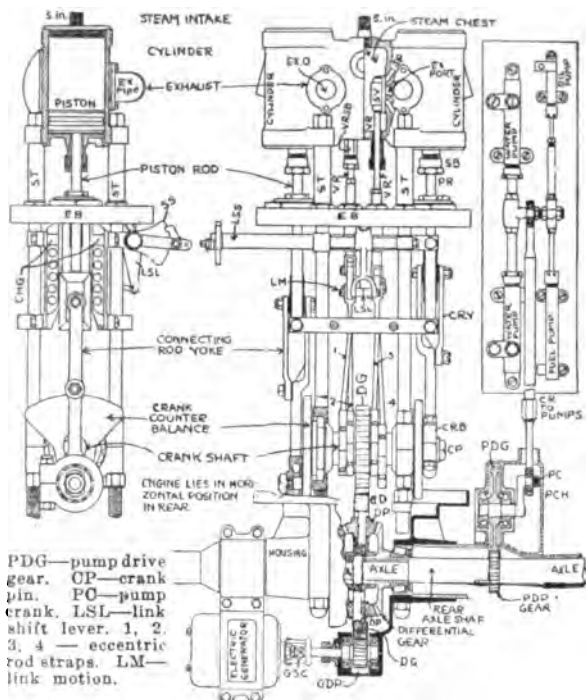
Stanley engine, rear axle and pump gear. The pumps are really mounted forward on chassis and are driven by a crank off rear axle. Electric generator also rear axle driven.
